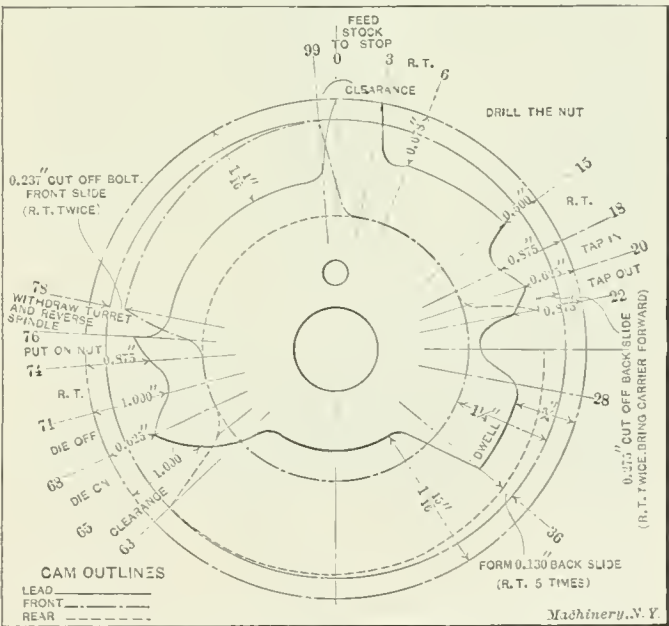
Cams used for Making and Assembling the Nut and Bolt
